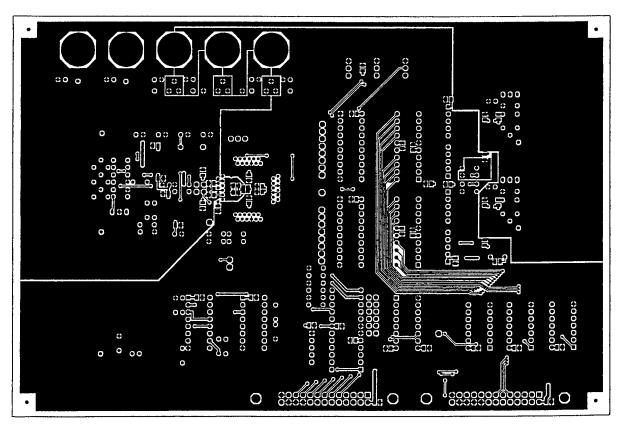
SOLDER SIDE SILK DIAGRAM
